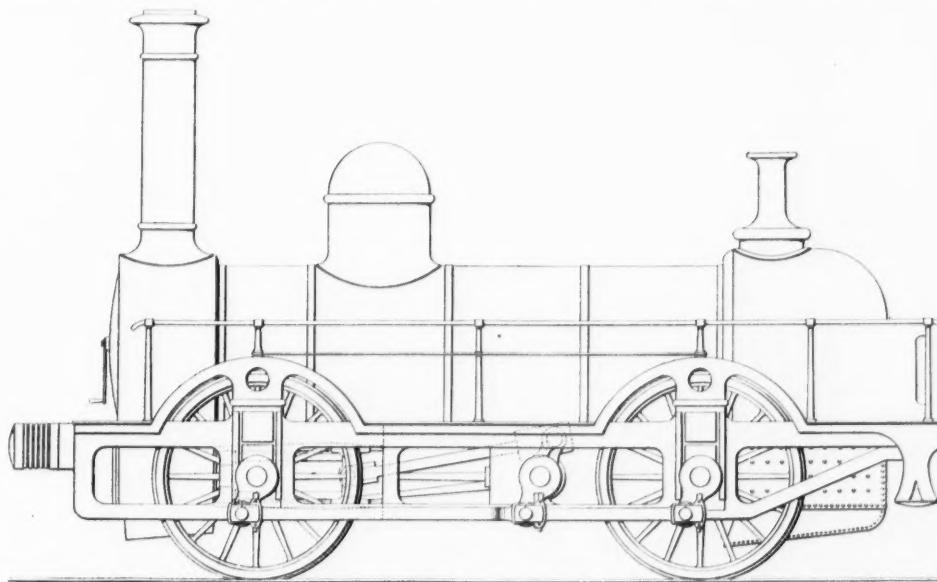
Tayleur and Co.'s Intermediate Crank Shaft Engine. Shrewsbury and Chester Railway. 1848.
